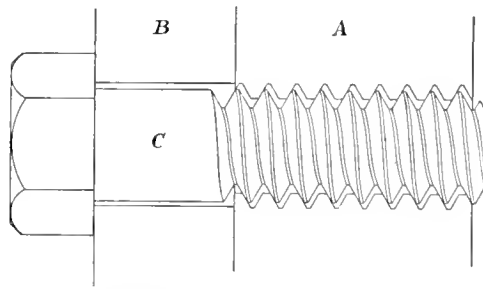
SCREW STANDARD BUT THREADED HOLE TOO LARGE
